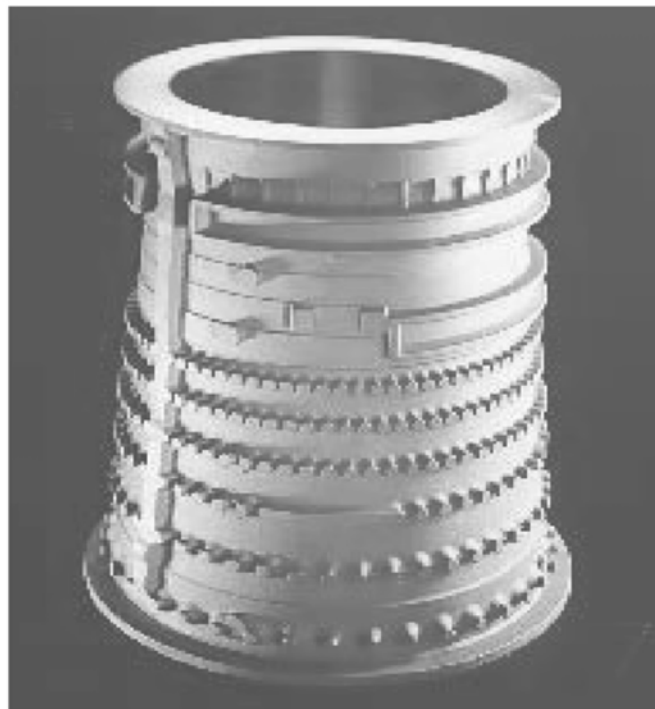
Titanium engine casing centrifugally cast into a shell ceramic mould
